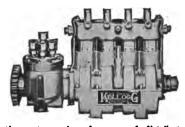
Kellogg self-starting system; view of pump and distributer. It is mounted on the engine and driven from some exposed shaft, such as water pump or cam shaft. A clutch is contained within the distributer for engaging the pump and can be operated from a convenient place on the dashboard. The distributer is timed at half the engine speed, so when the engine stops, it is in such a position that it will allow the air from the tank to rush into the proper cylinder and to each cylinder consecutively. Admitting the air from the tank to the distributer is accomplished by the simple pressure of a button on the dash. Aside from the foot valve, a hand valve is also provided as an extra precaution when the engine is to be left over night; 150 lbs. of air is carried in the tank.
